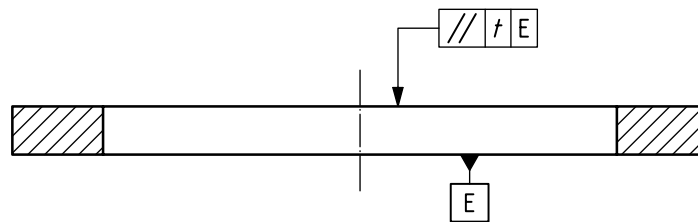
Example of a parallelism tolerance: extruded-product cut section
